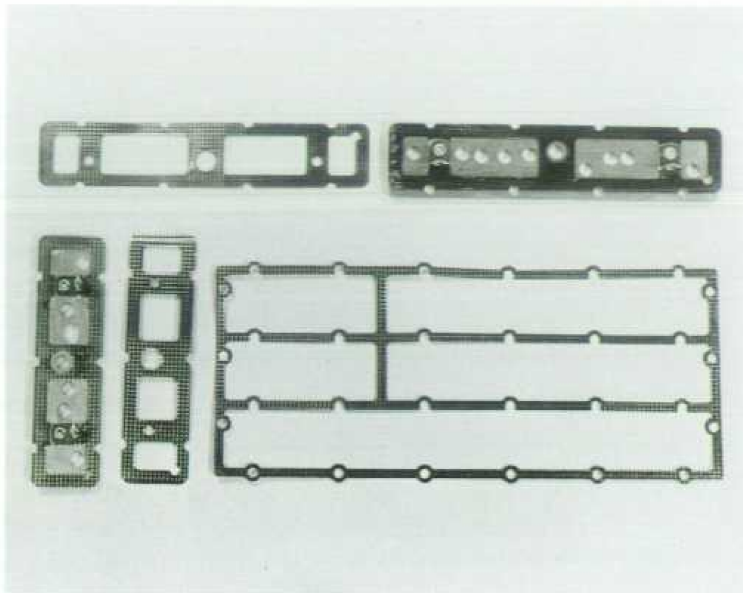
Copper waffled gaskets seal the interfaces between the extrusions and the extrusion covers and motherboards.
